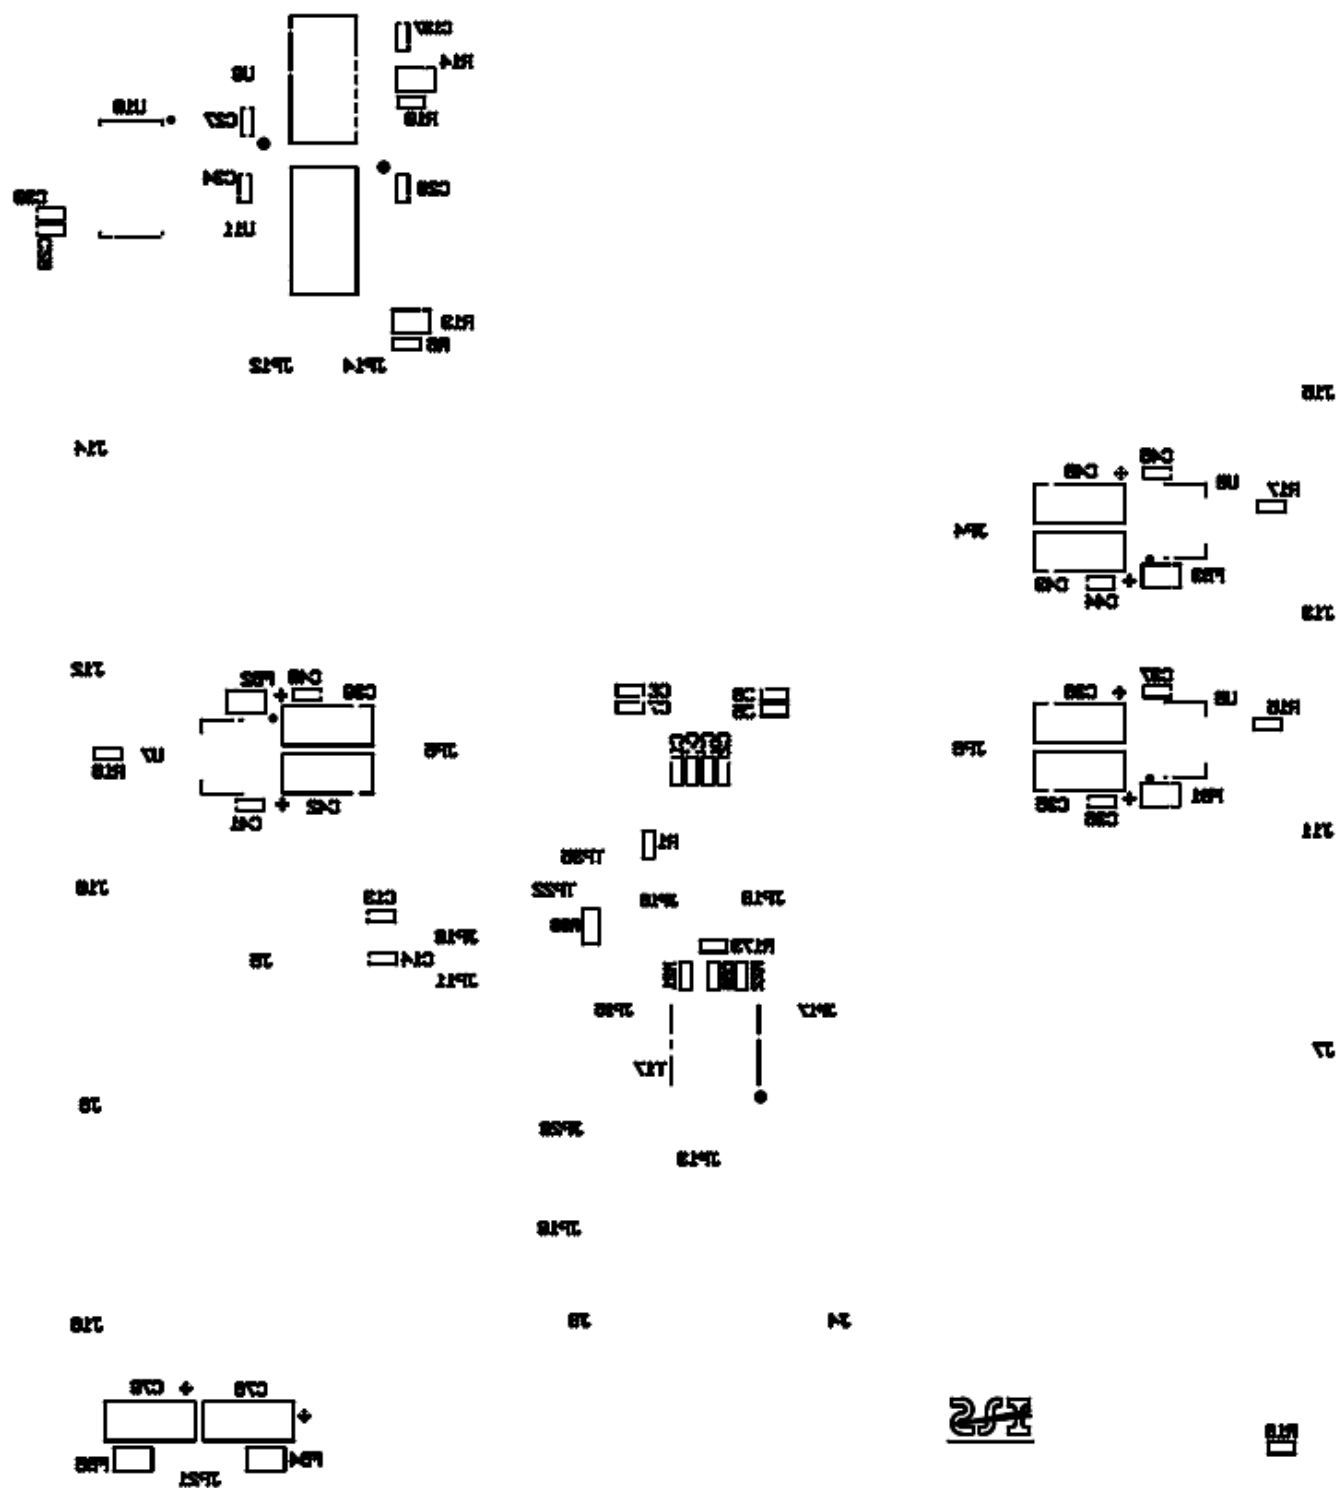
ADS5295EVM Bottom Layer Assembly Drawing – Bottom View
